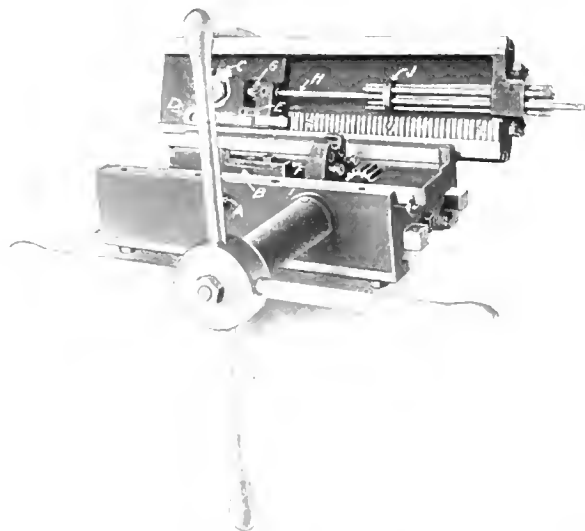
Slide removed from Saddle, showing Indexing Mechanism and Adjustable Stops
